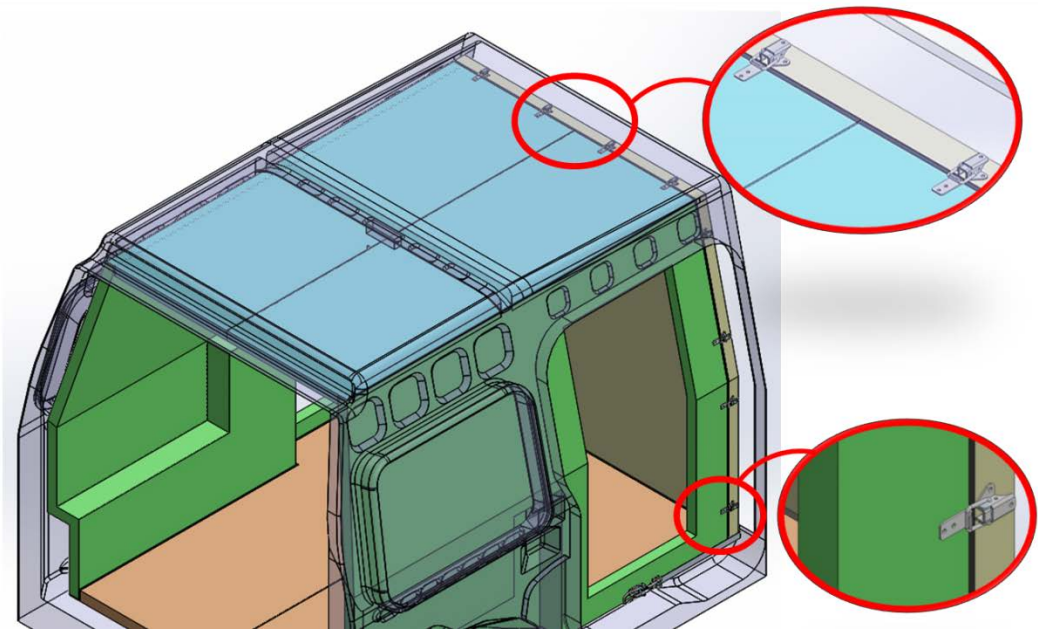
Use of toggle clamps to attach and hold the front panels to the side panels.
